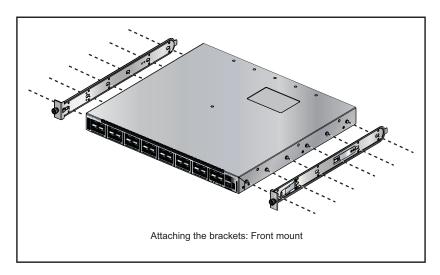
Attaching the Mounting Brackets to the Switch Chassis
